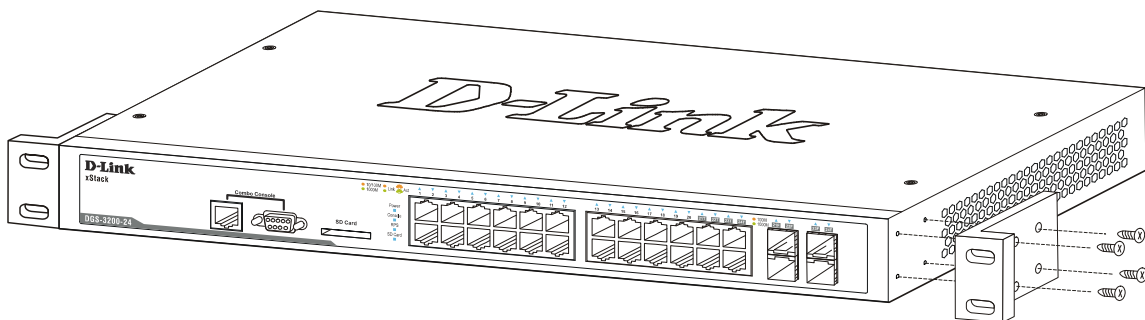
6. Fasten mounting brackets on the DGS-3200-24
